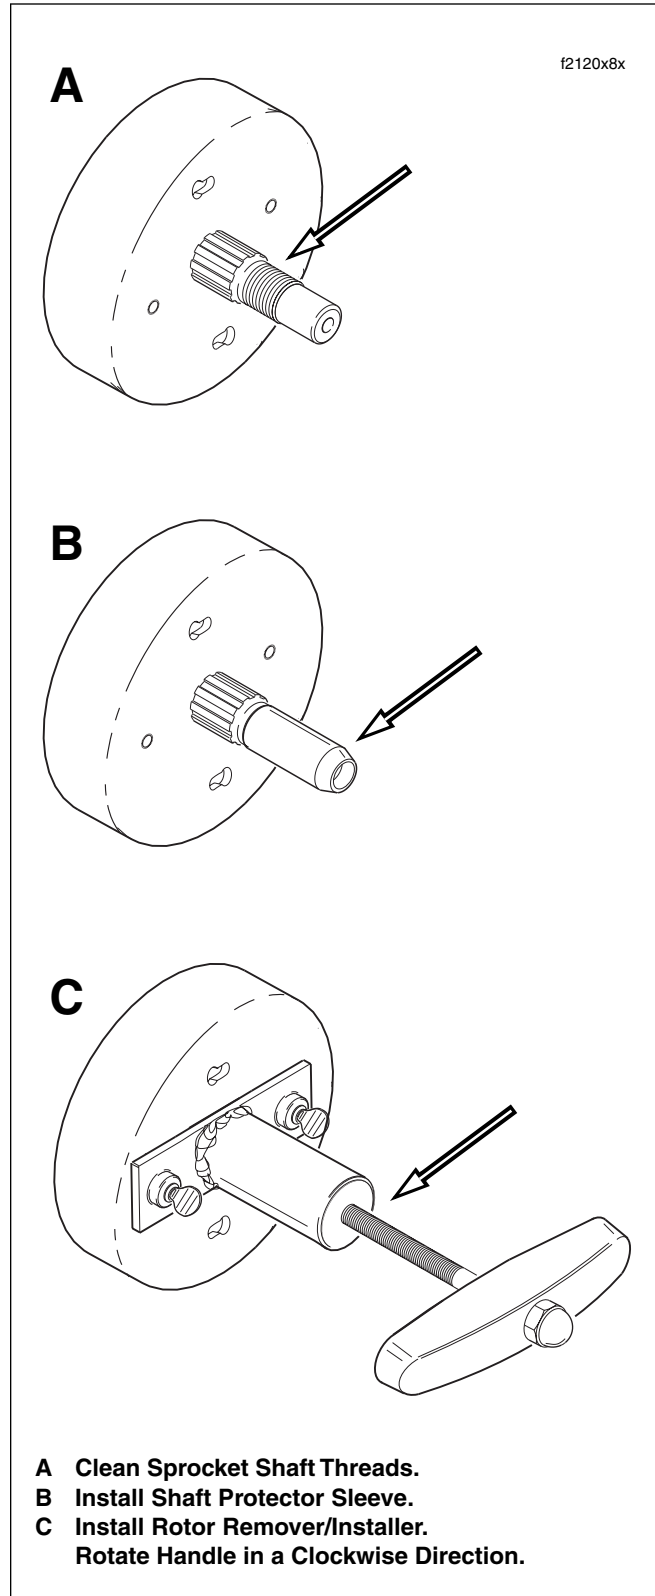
Remove Rotor from Engine Sprocket Shaft
